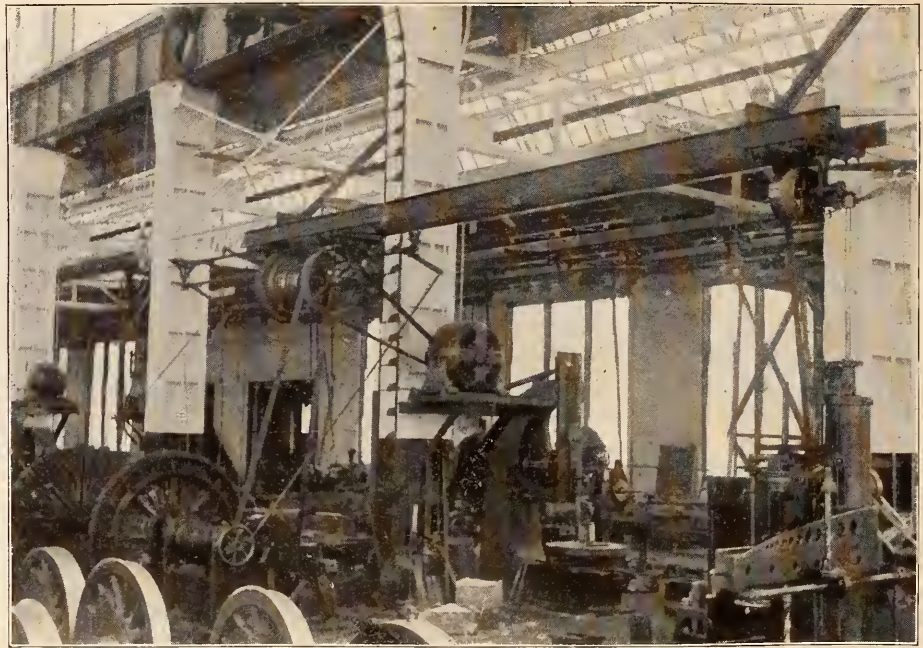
SHOWING ARRANGEMENT OF COUNTER SHAFING AND LOCATION OF MOTORS FOR DRIVING MACHINE TOOLS SERVED BY TRAVELING CRANE—C. & E. I. R. R.
